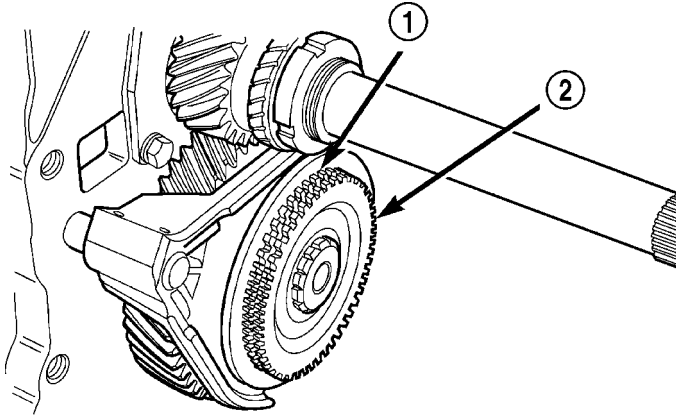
FIFTH GEAR SYNCHRO STRUTS AND SPRINGS
